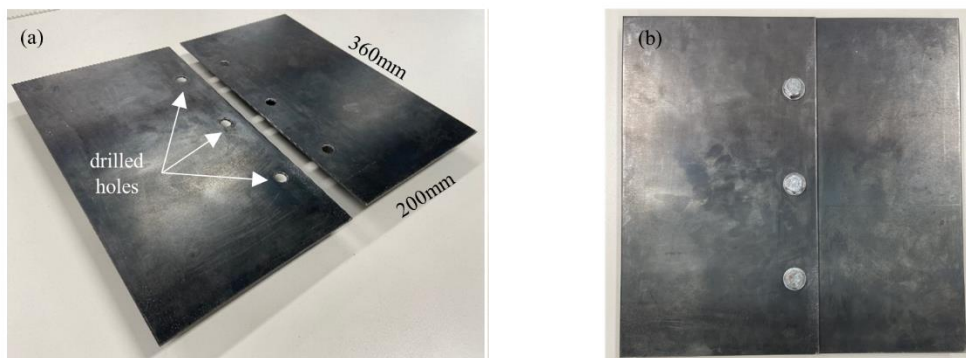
Steel specimens (a) before joint; (b) after bolted joint
